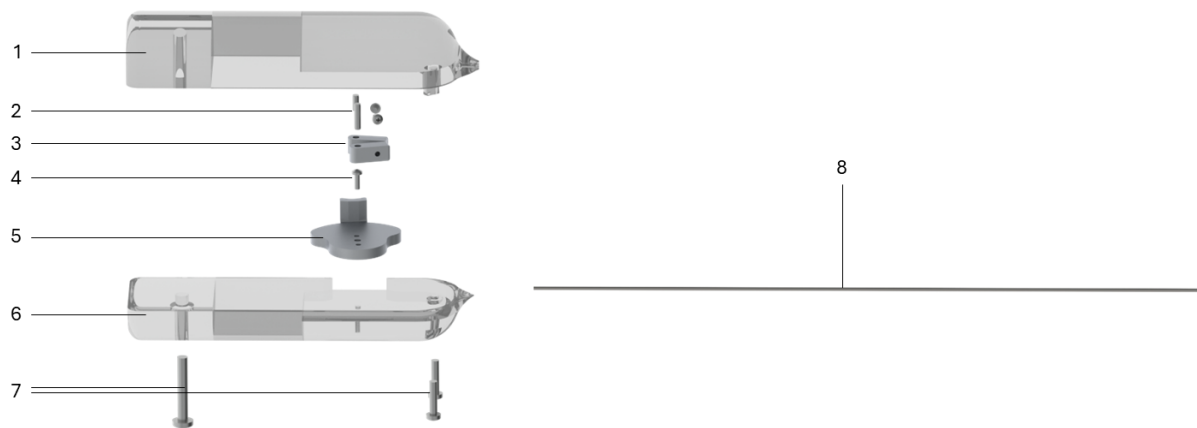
Exploded view of the actuation unit and steerable needle, showing the top cover (1), pins and screws (2), mounting blocks (3), pin (4), rotation wheel (5), bottom cover (6), screws (7), and steerable needle (8).
